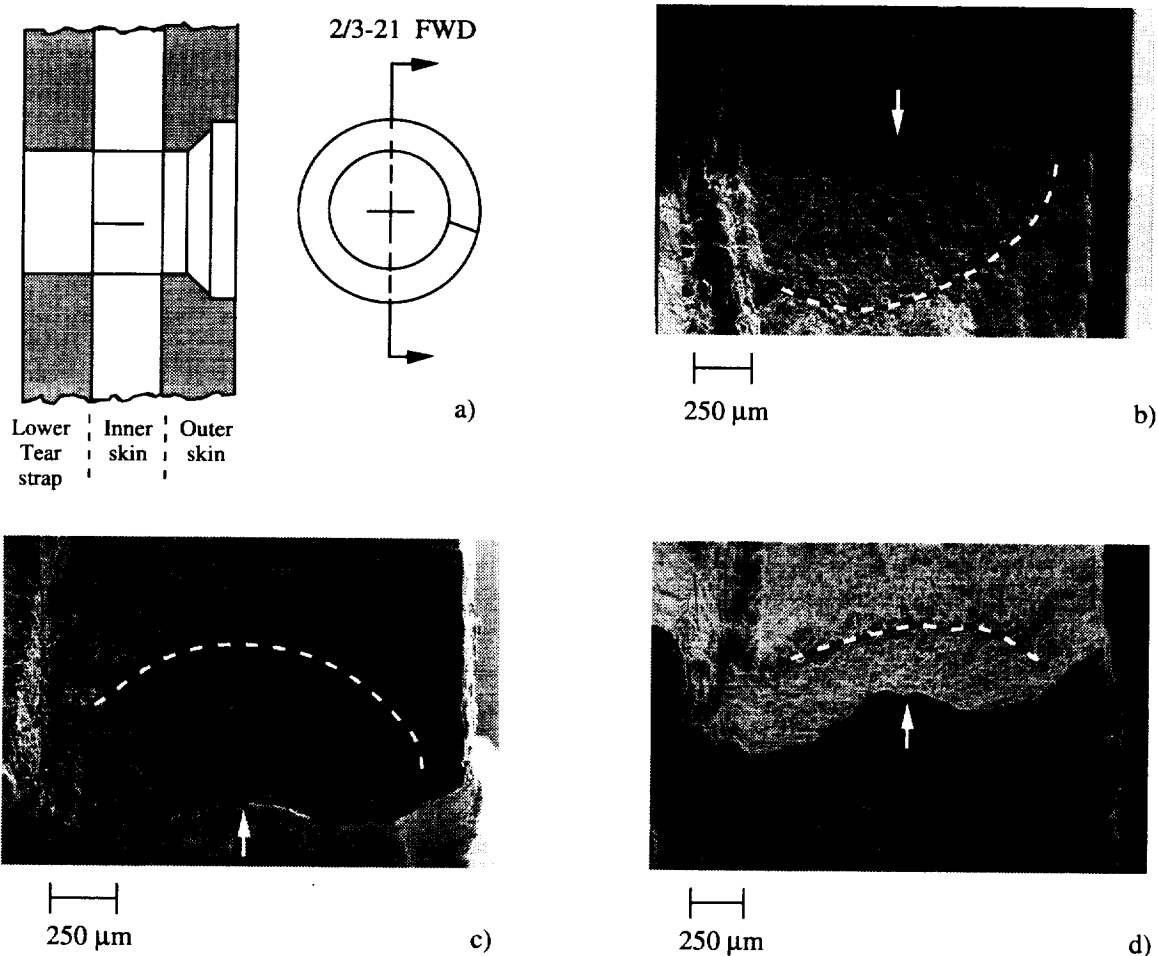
a) The schematic shows the rivet hole 2/3-21 configuration and the location of the inner skin fatigue crack oriented in the forward direction and below the 3 o'clock position. b) The SEM micrograph shows the fatigue crack fracture surface located along the rivet hole contained in the inner skin. The arrow marks the region of crack initiation, coincident with a rivet hole indentation. The dashed line marks the fatigue crack front. The region on the left side of the micrograph is the bond between the inner skin and tear strap. c) The SEM micrograph shows the inner skin rivet hole fatigue crack oriented at a 45° angle to the SEM beam. The arrow marks the crack initiation site and the dashed line marks the fatigue crack front. d) The SEM micrograph shows the inner skin fatigue crack at a third orientation. Here, the irregular rivet hole surface is highlighted with respect to the fatigue crack (crack front marked by the dashed line) fracture surface and the crack initiation site (arrow).
